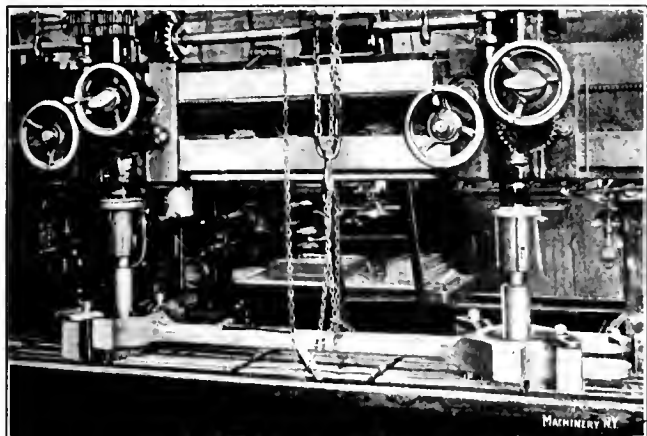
Finishing the Holes in a Connecting-rod in a Two-spindle Drill Press
